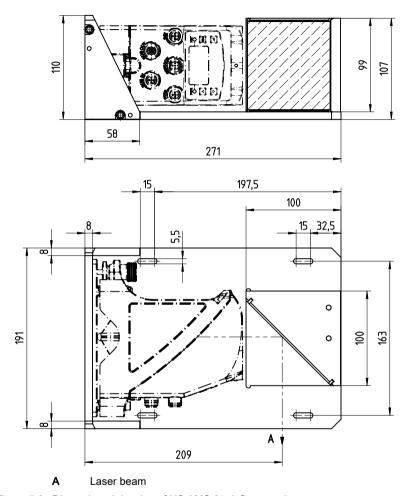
Dimensioned drawing of US AMS 01 deflector unit
